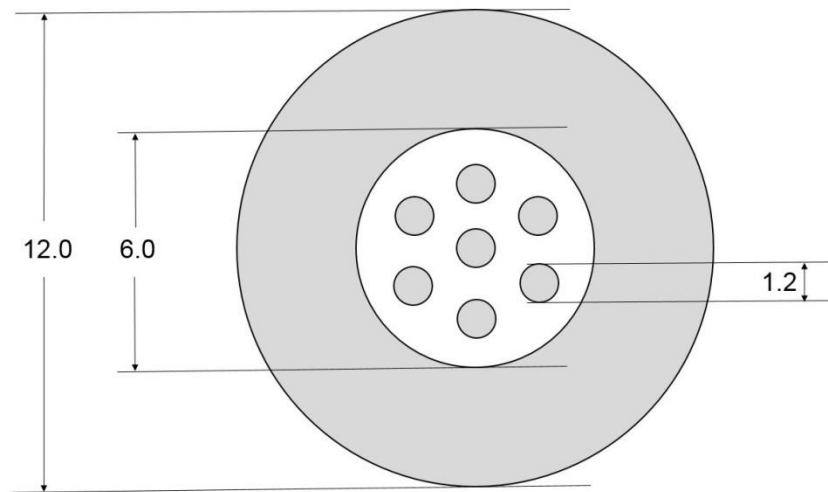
Indicative cross-section of PET tube with filaments system before drawing. Dimensions in mm.
